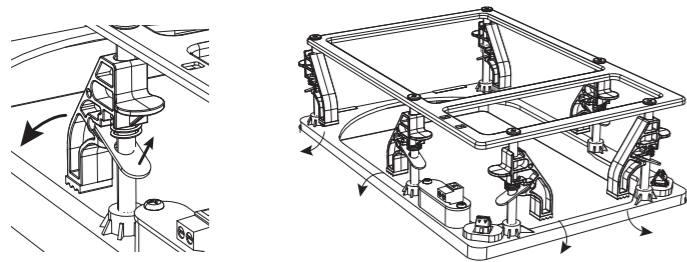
Adjusting the Mounting Clamps from the Stowed Position
